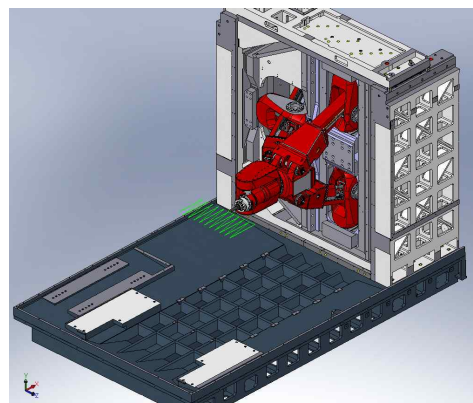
Tool trajectories of multi-axes machine tools under 1,000 N in Y direction
